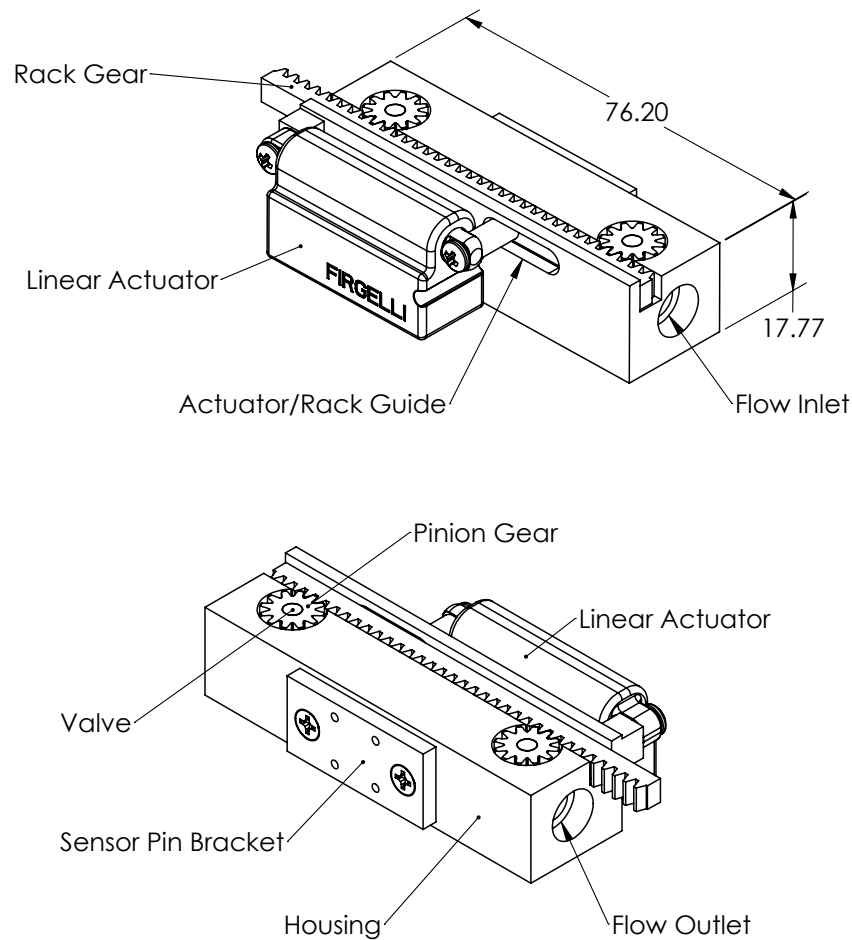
Schematic displaying the pollution measurement device and its components. Units are in mm .
